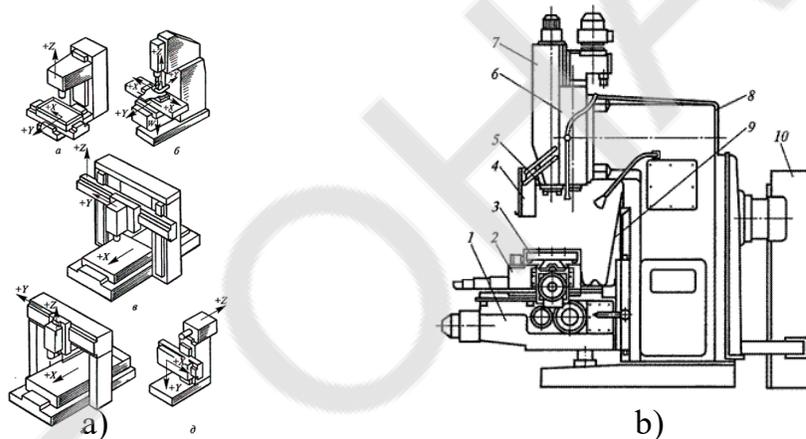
a) Arrangements of CNC milling machines b) CNC milling machine: 3– table; 5–spindle; 6– milling headstock; 8– bed
